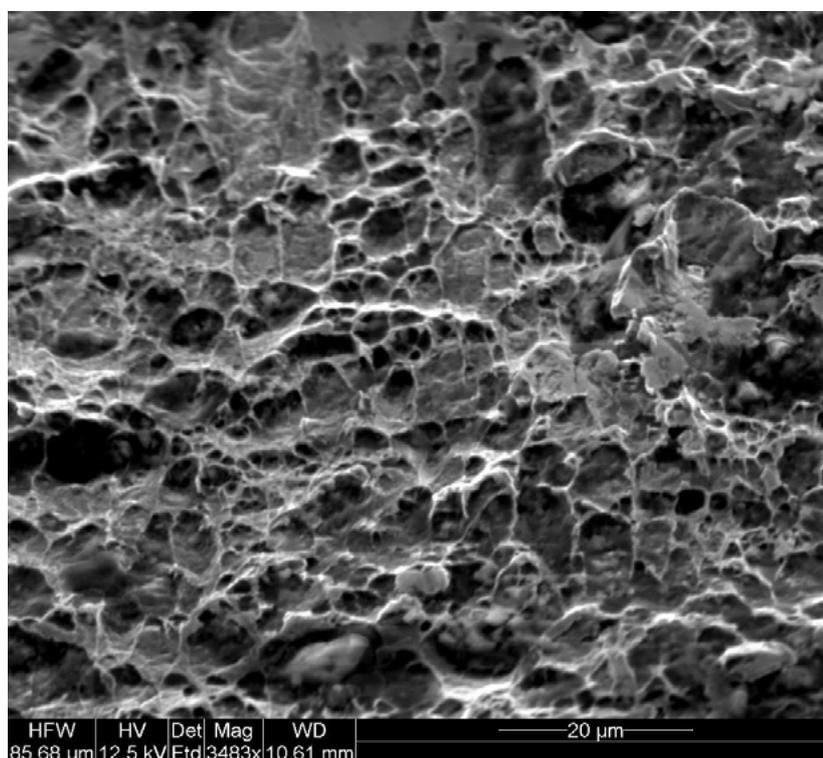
Internal bellow plate width section: dimple morphology indicative of ductile fracture.
